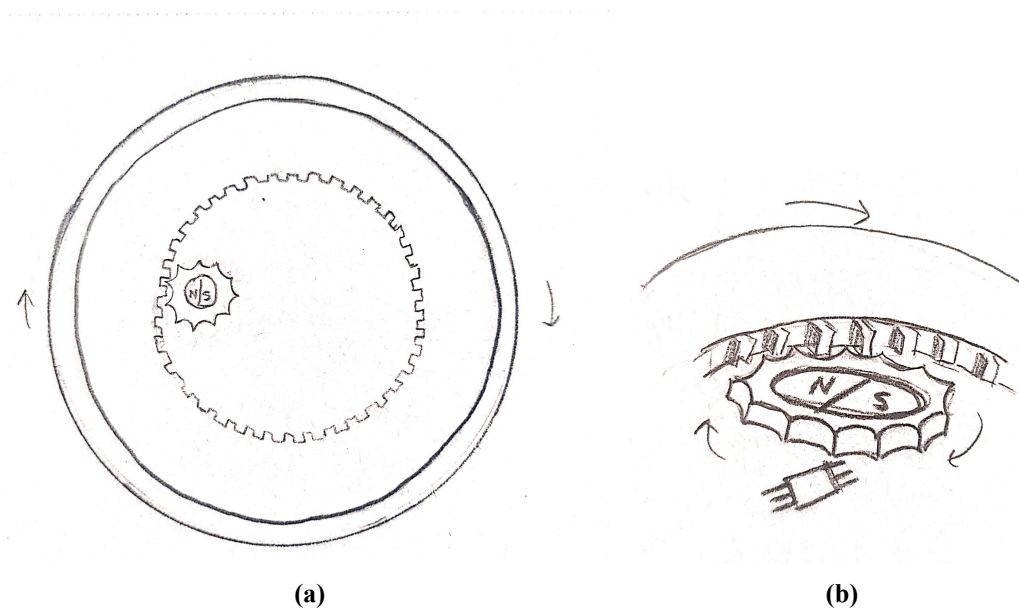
a) Outer rotating gear turning the inner gear with a magnet inside. b) A sensor can be placed underneath, reading the magnet.
